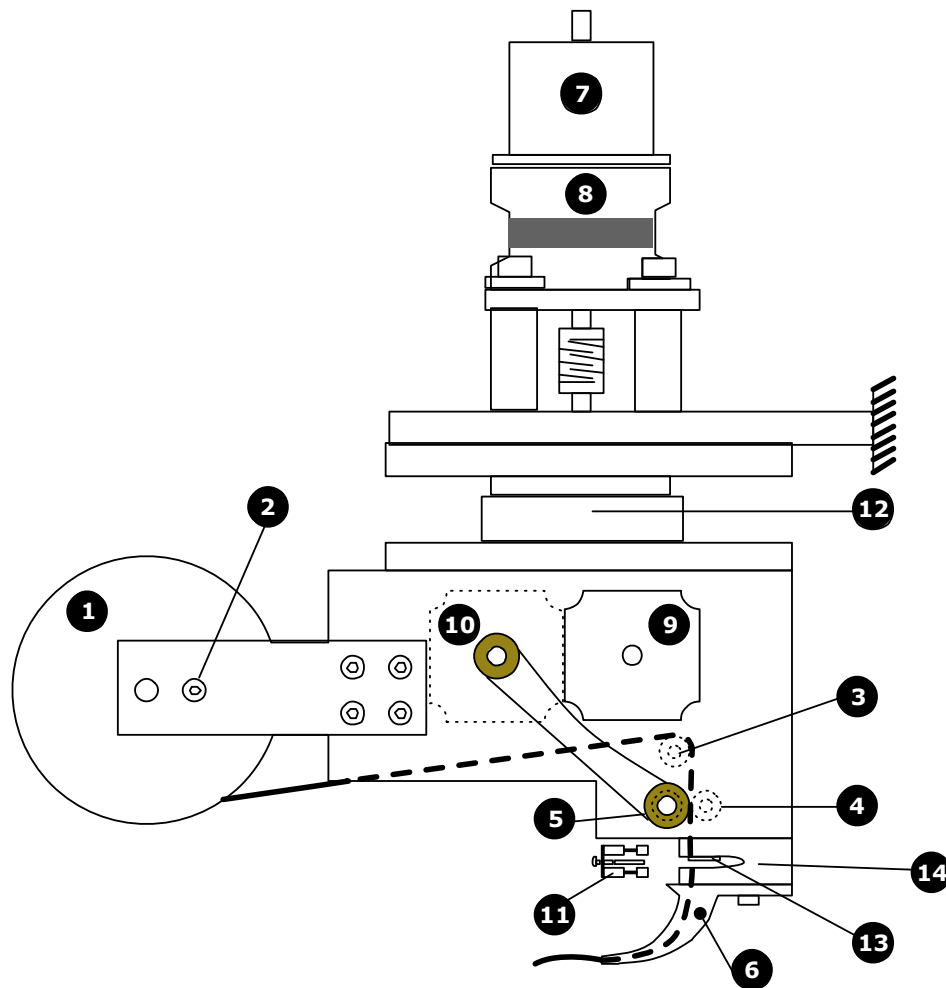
Components of the payout system: ① tow reservoir, ② inbound tow tensioner, ③ routing roller (idle), ④ traction tension roller (idle), ⑤ driven traction roller, ⑥ feed nozzle, ⑦ A axis stepper motor ⑧ planetary gearbox, ⑨ C axis (cutting) stepper motor, ⑩ V axis (payout) stepper motor, ⑪ cutting carriage, ⑫ head-rotation bearing, ⑬ fixed blade, ⑭ cutting block.
